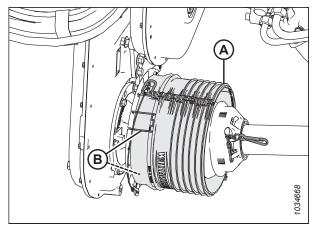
Driveline with Shield Installed on Float Module Gearbox
